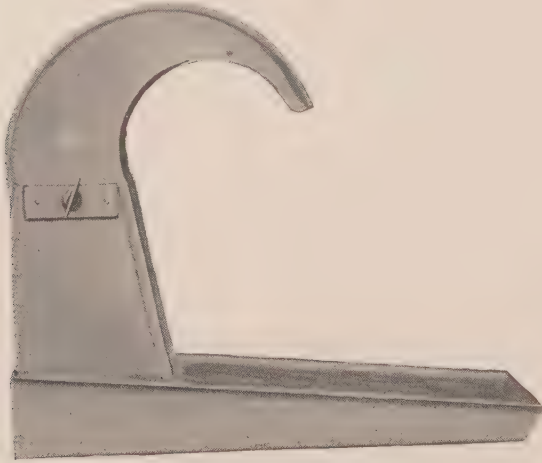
A lathe splasher of this type protects the worker and is especially valuable in grinding precious metals.
